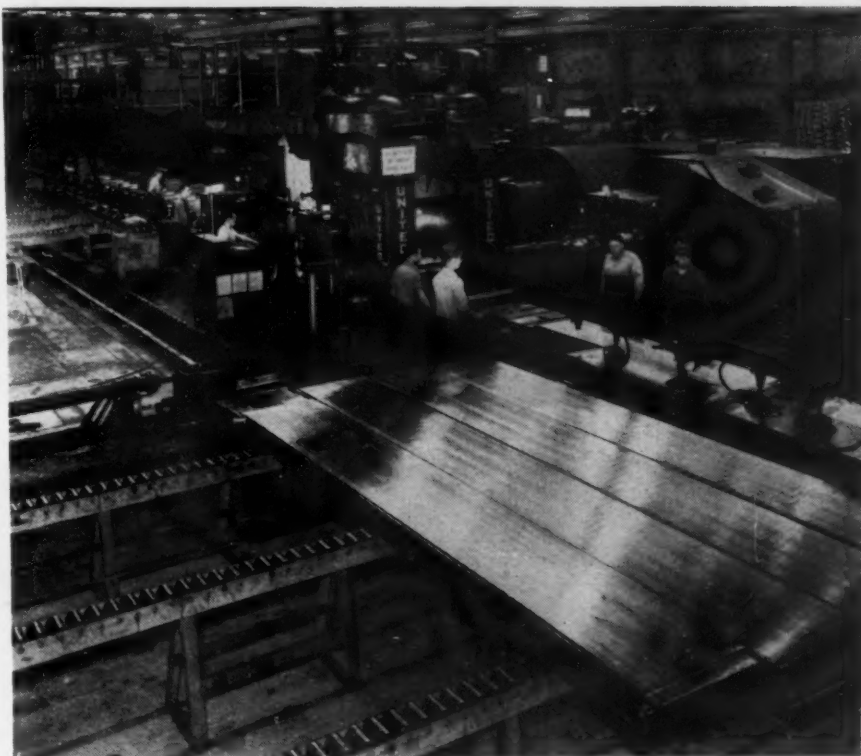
The slabs are conveyed from the roller table on to a cross chain conveyor and after cooling are charged from a storage roller table onto the millers (shown above), which first one surface of the slabs is machined off, then the other, the work being turned by a flopper between the two. Milling is done on the bottom side of the slab so that the chips will fall away from the work. From this point, some of the slabs, which have been angle sheared, go directly to the blanking and cupping presses while others are cut to length for the tandem cold mill.
